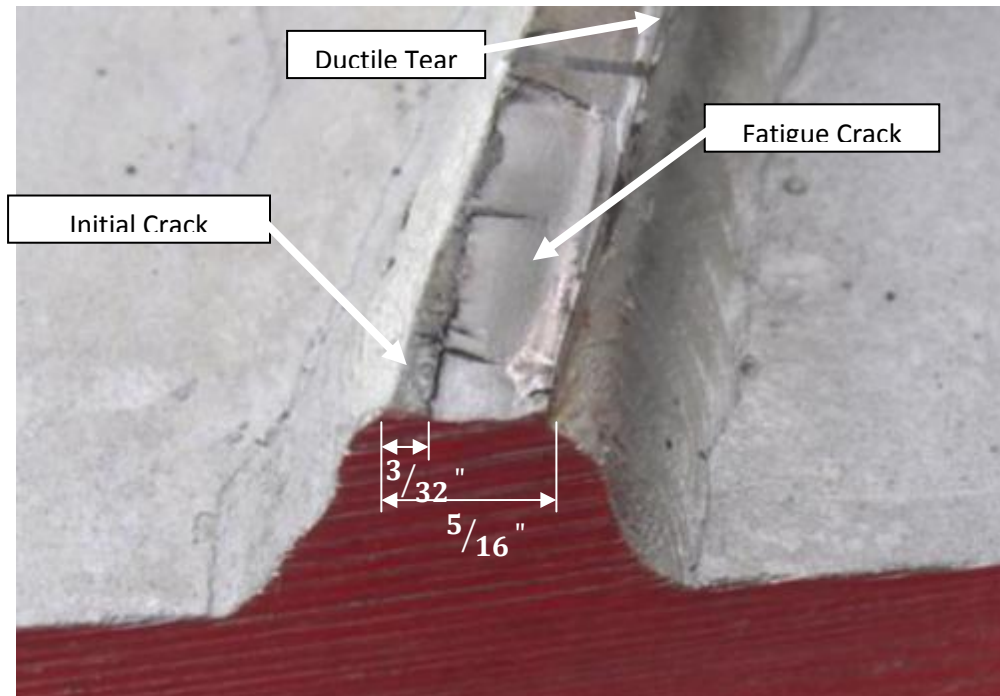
Depth of Initial Crack at Weld Toe
